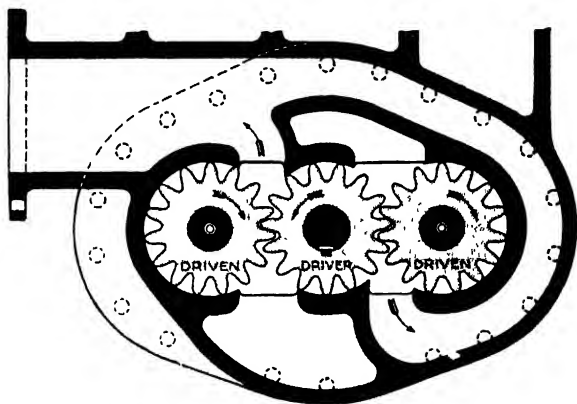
Sectional Elevation of Main Oil Pump, Three-wheel Type
